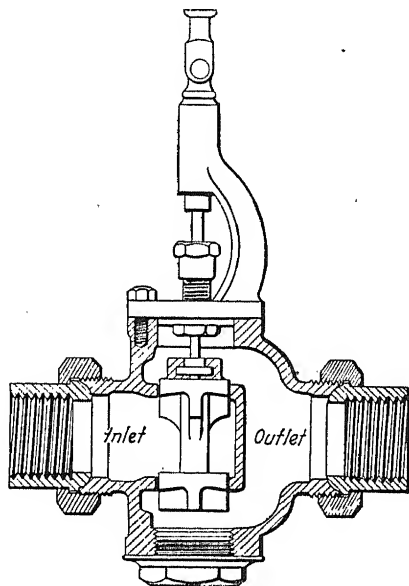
Section through a balanced valve. (*Mason Regulator Co.*)
